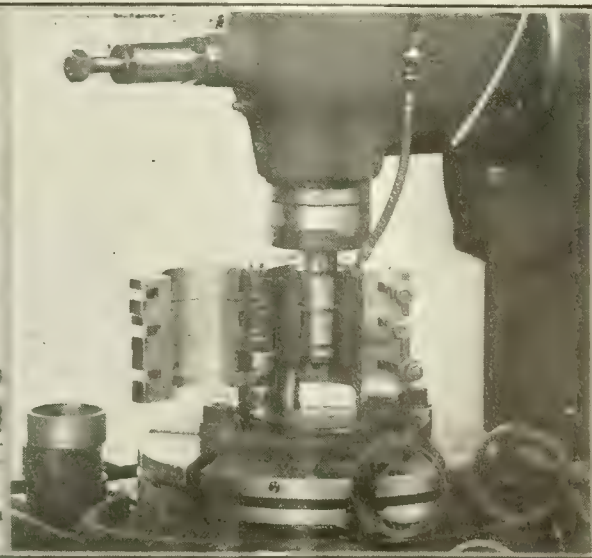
A GOOD EXAMPLE OF THE VALUE OF VERTICAL MILLING ATTACHMENT.
